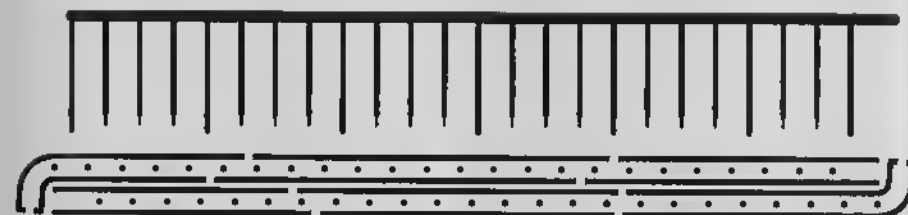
A rung-type ladder with a "ladder comb" for easy assembly.
